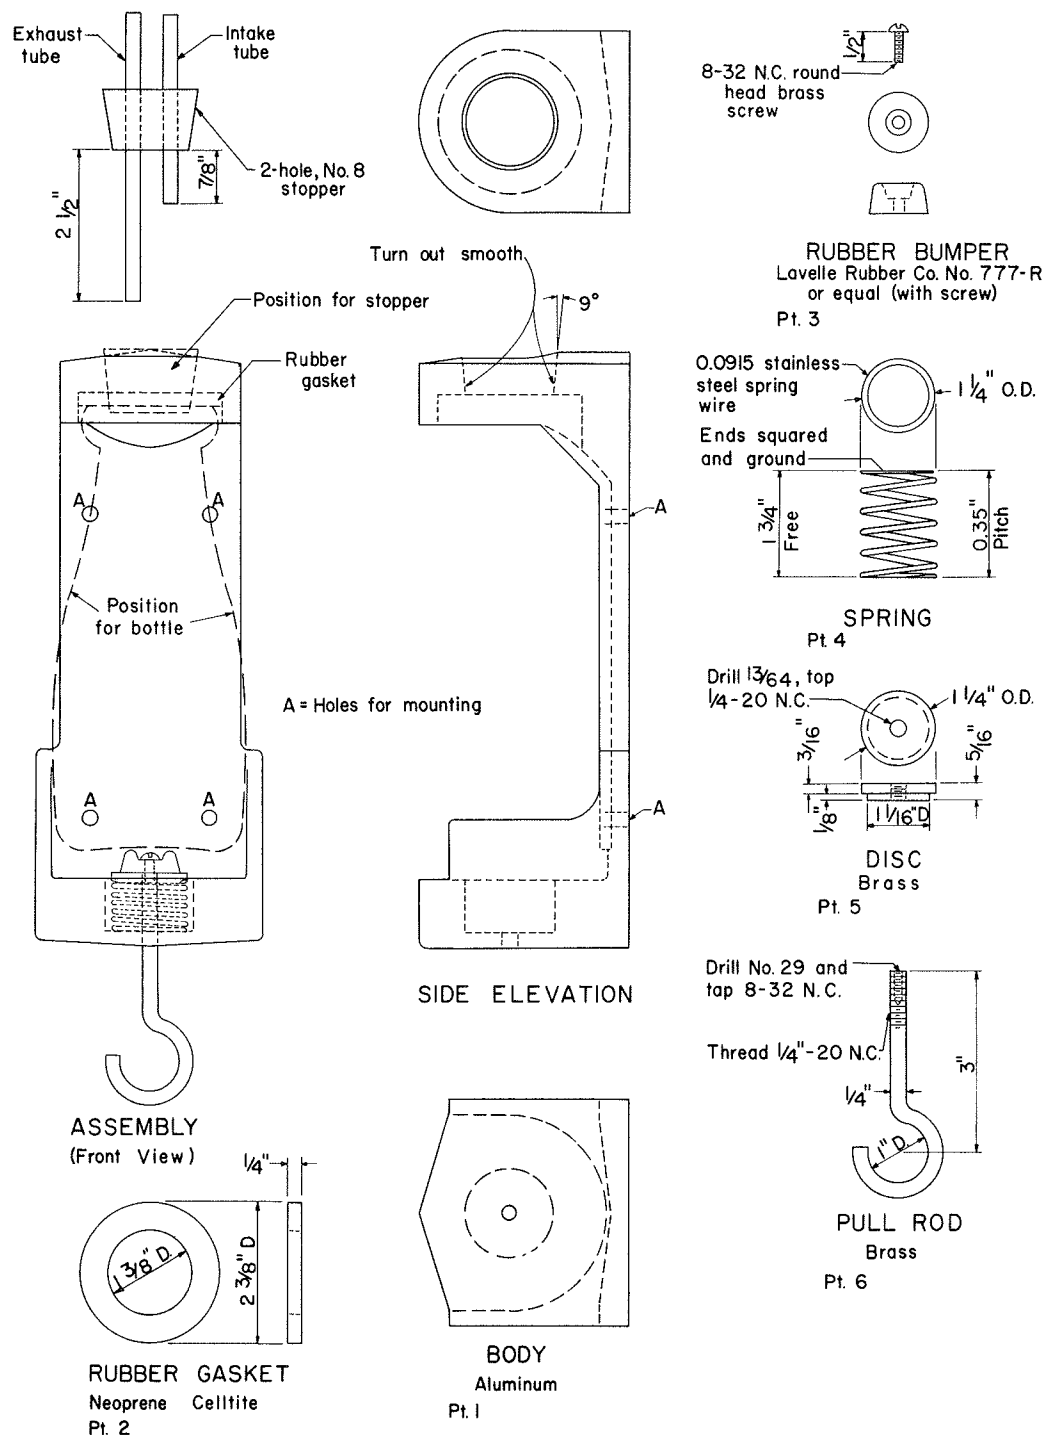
SAMPLER FRAME FOR PERMANENT MOUNTING
